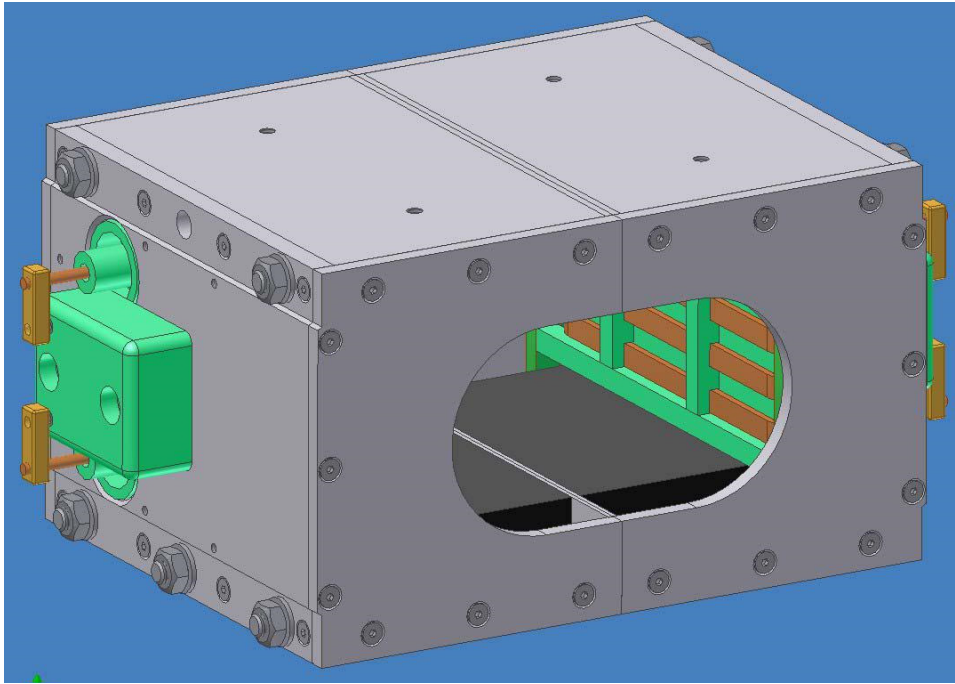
A 3-D view of an assembled injection bumper magnet.
